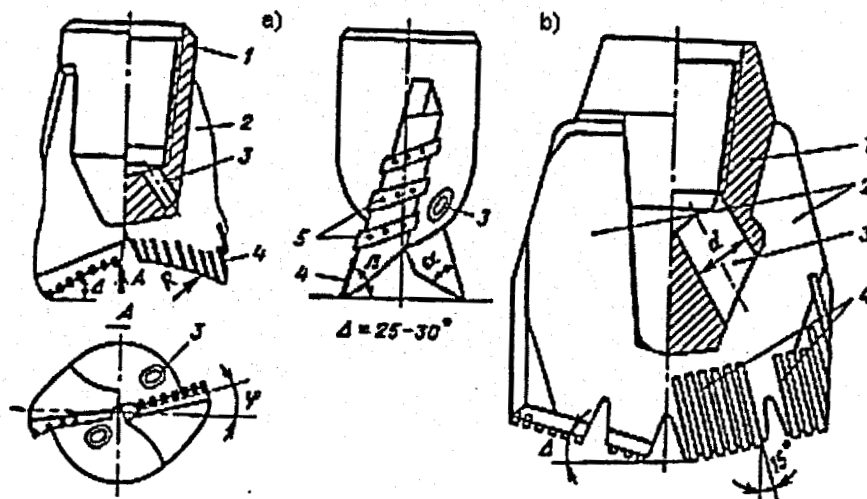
Steel chisel bits with WC/Co cutters for drilling without core sample.
